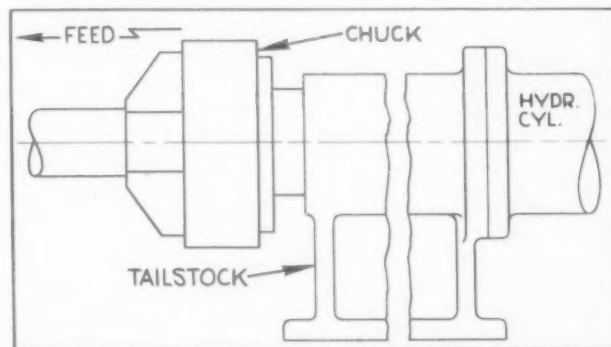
is a schematic diagram of a tailstock, equipped with a hydraulic cylinder, for feeding tubing or bar stock into the dies. Work is gripped by a chuck, which may be wrench or air operated, as desired. For smaller work, spring collets could be used instead of the chuck.
